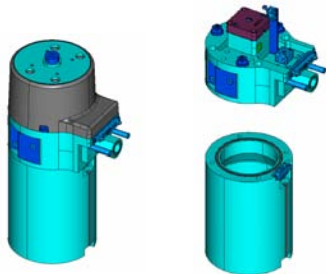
Commercial borohydride vaporizer shown with valve and heating head separated.
